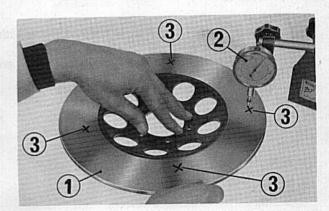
(1) Brake disc (2) Dial gauge (3) Measuring points
